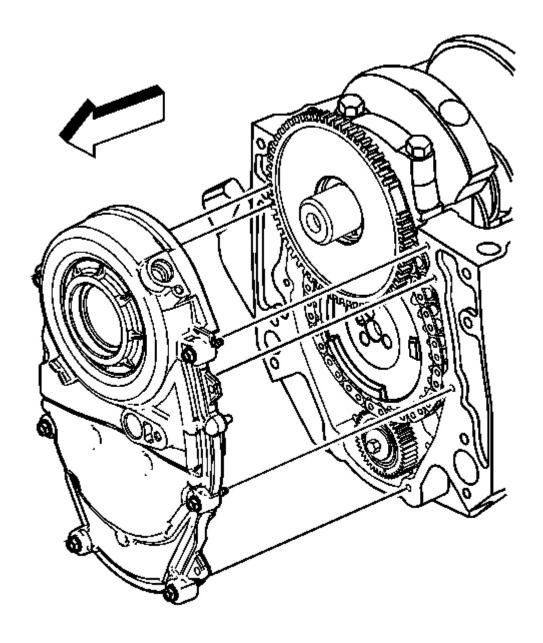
Engine Front Cover Courtesy of GENERAL MOTORS CORP.
